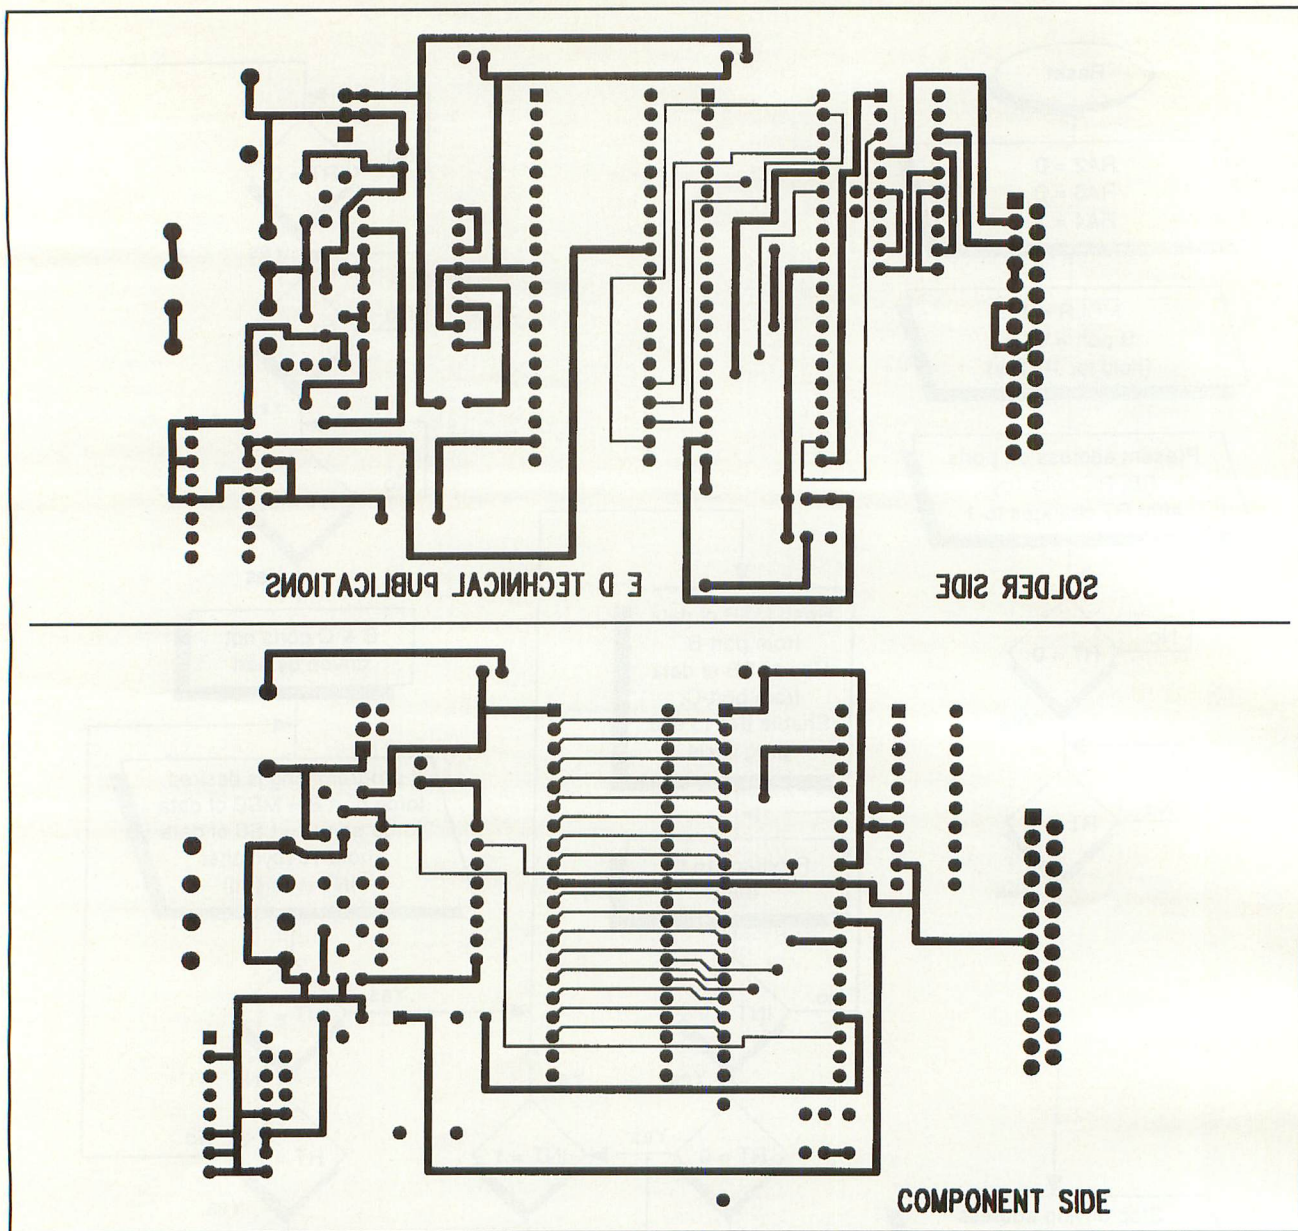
Actual-size artwork for component (upper) and solder (lower) sides of printed-circuit board.
